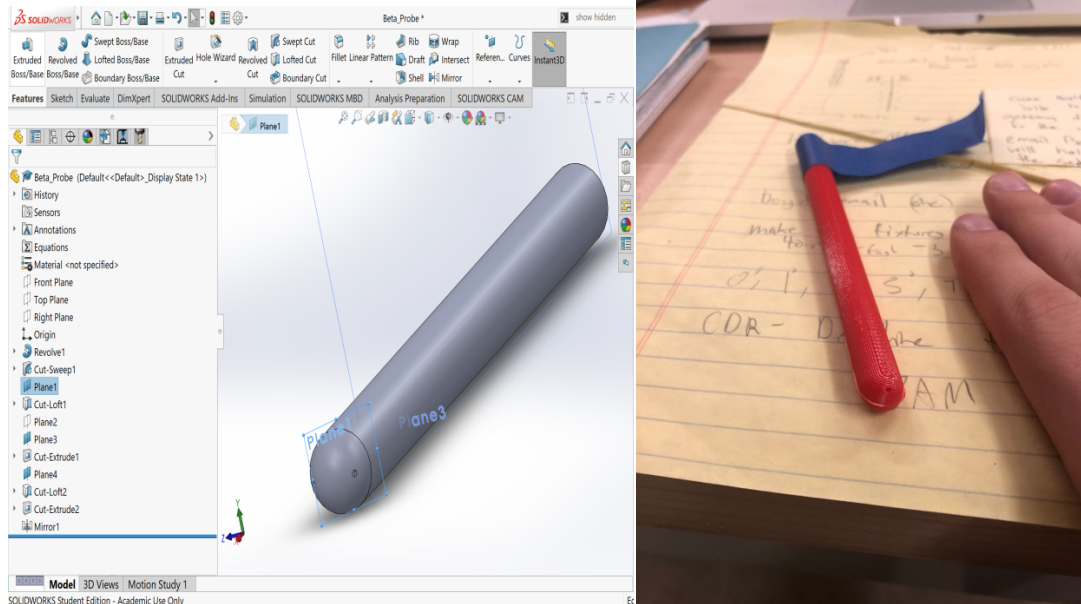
(left) and 18 (right) The Beta Probe in Solidworks and the 3D printed Beta Probe.
